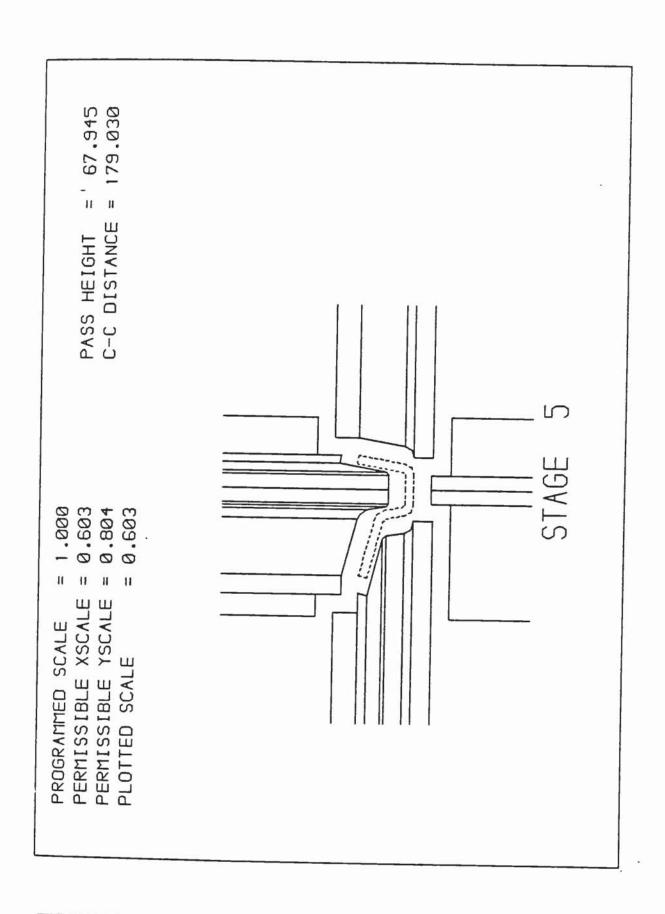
ROLL DRAWING TOP, BOTTOM AND SIDE ROLLS
